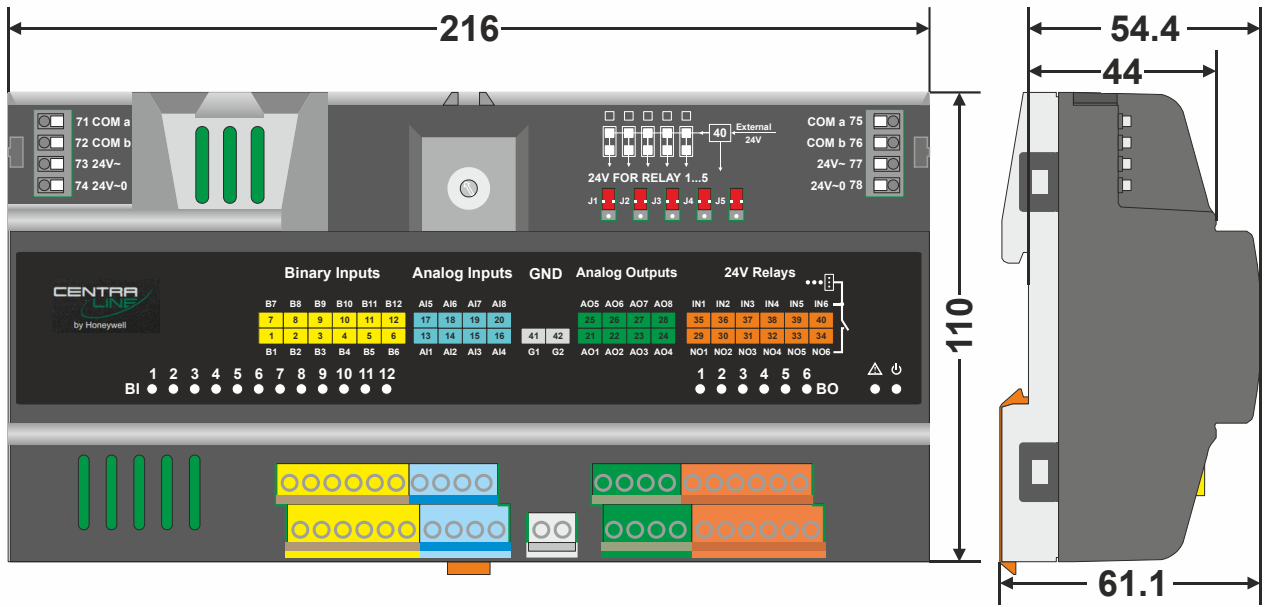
CLIO831 mixed Panel Bus I/O module, dimensions (in mm)
